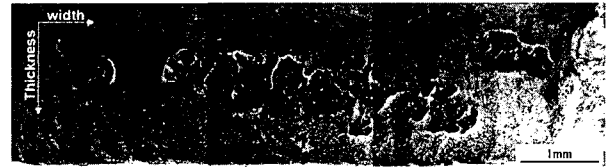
SEM fractograph of flash butt weld exposed by bending test
